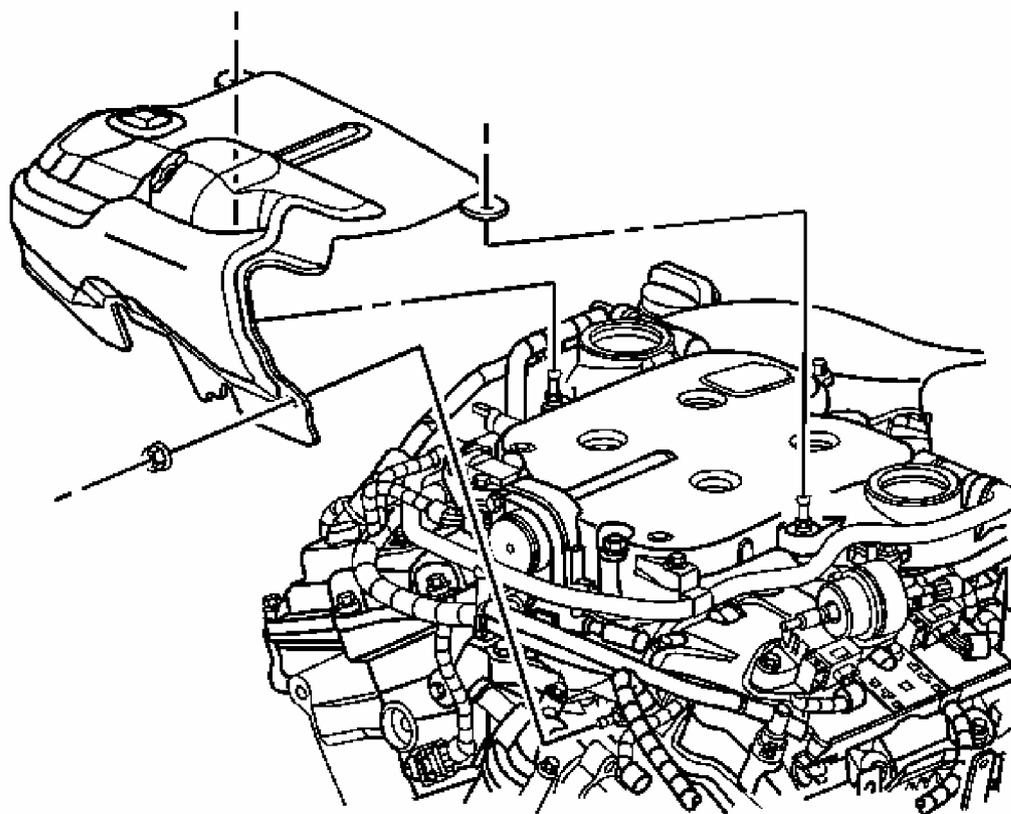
Removing & Installing Rear Upper Intake Manifold Cover
